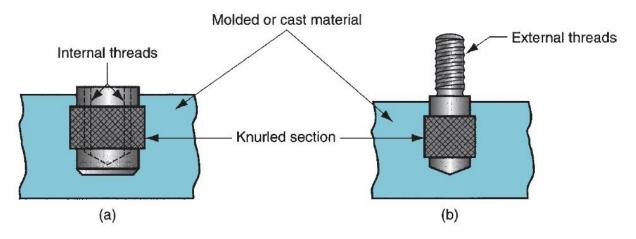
Examples of molded-in inserts: (a) threaded bushing and (b) threaded stud.
